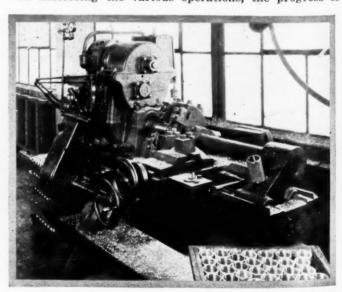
Reed-Prentice lathe with back arm attachment and air chuck completely machines the outside and chamfers ends
